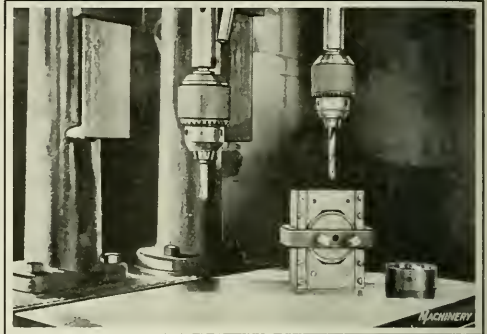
Drilling the Holes through which the Gage Spindle operates
